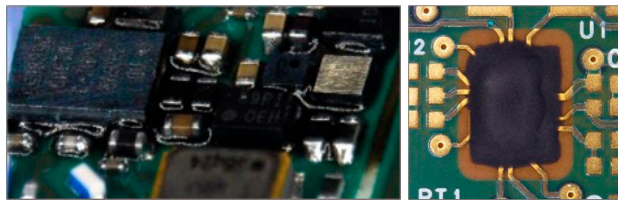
Left, an underfill material covering the solder joints of the components soldered onto the PCB. Right, an encapsulation material fully covers the die and all the wire bonds that connect it to the PCB.
